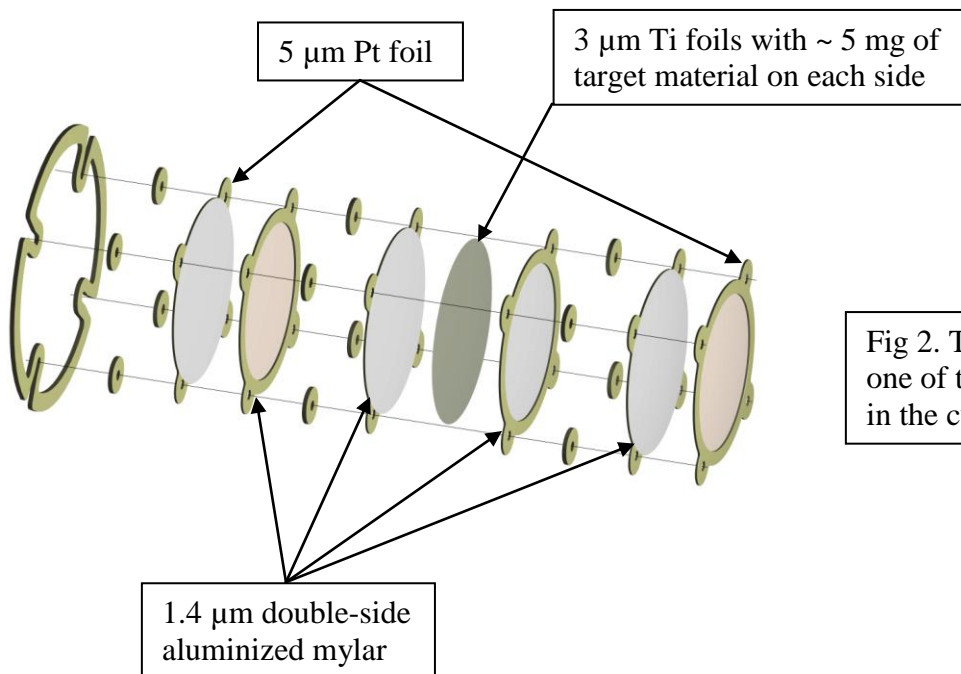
The exploded view of one of the target assemblies in the current PPAC.
